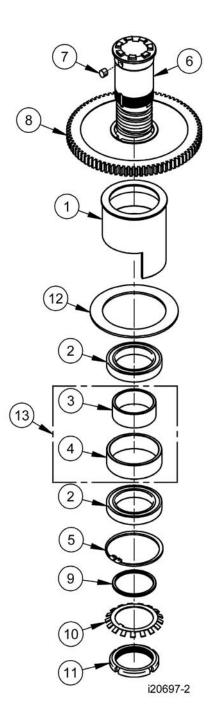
Gear Housing Sub-Assembly P/N: 20697-1
